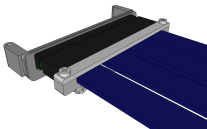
MET-BEZEL-IO146-LOCK Top View
